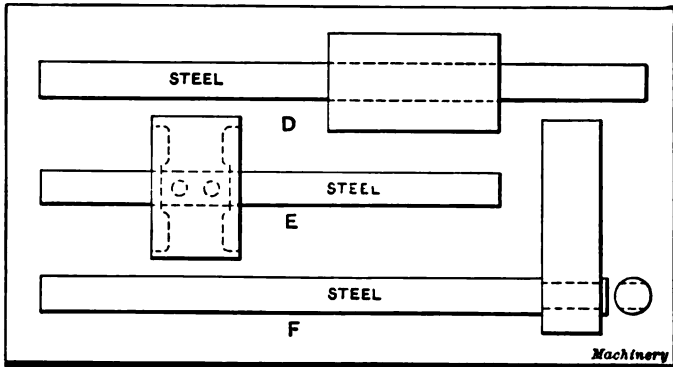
Methods of attaching Die-cast Gears, etc., to Shafts
